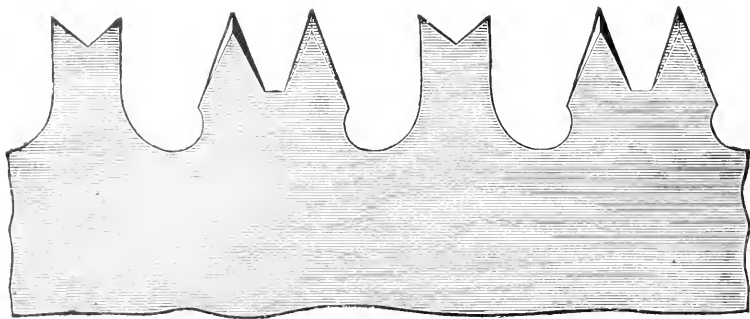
represents a section of our improved Tuttle tooth-saw; the cleaner tooth must be filed square and about one thirty-second of an inch shorter than the cutting tooth. (See gauges for regulating cleaning teeth pages 57 and 64).
